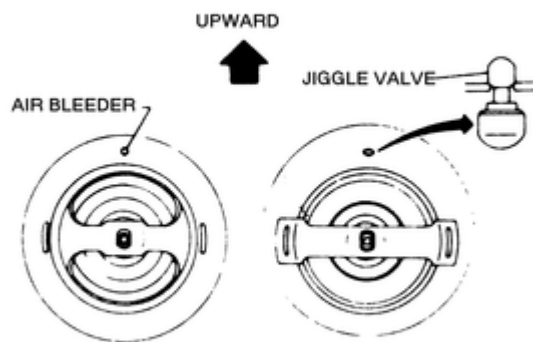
Thermostat mounting — VG30i and VG30E engines
